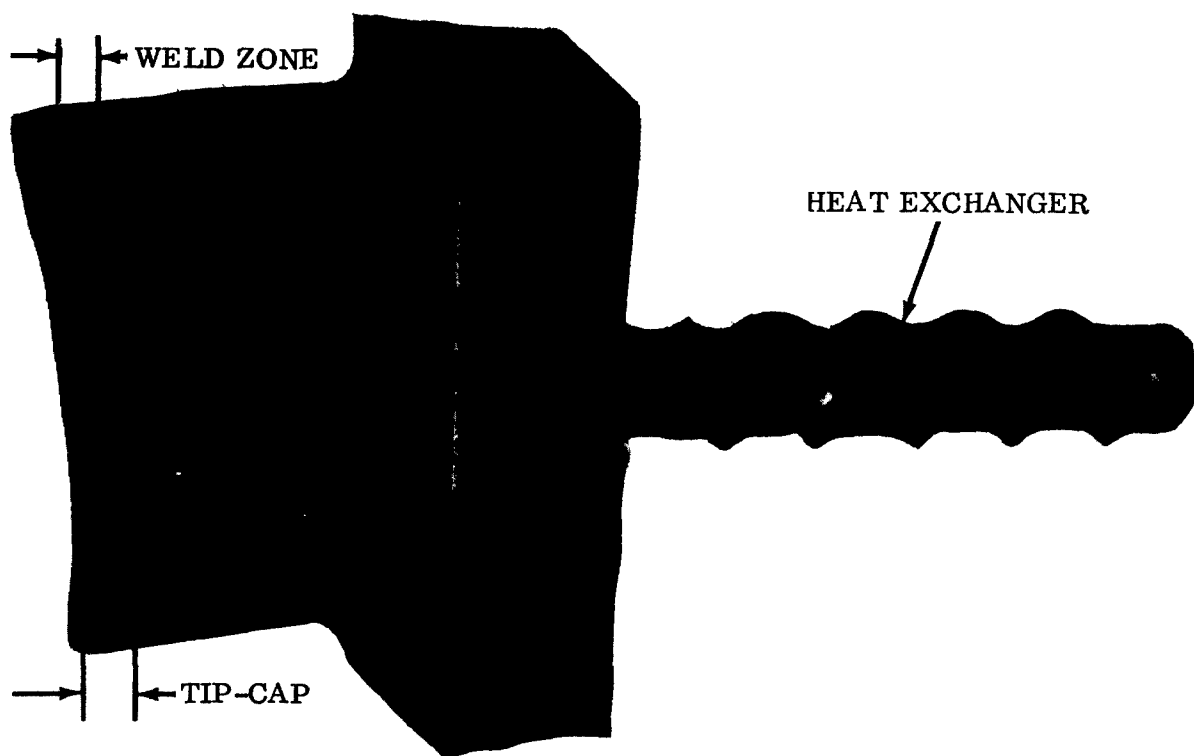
Machined, Welded Airfoil Blade and Tip-Cap.
